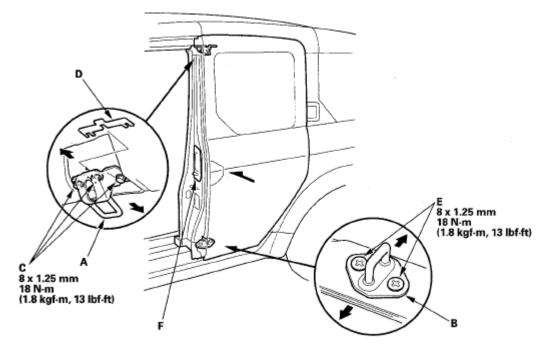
Identifying Rear Door Striker Adjustment With Torque Specifications Courtesy of AMERICAN HONDA MOTOR CO., INC.
